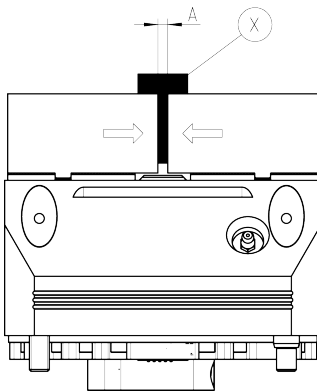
clamping force block with workpiece "clamped" - Teach position 2, O.D. clamping
